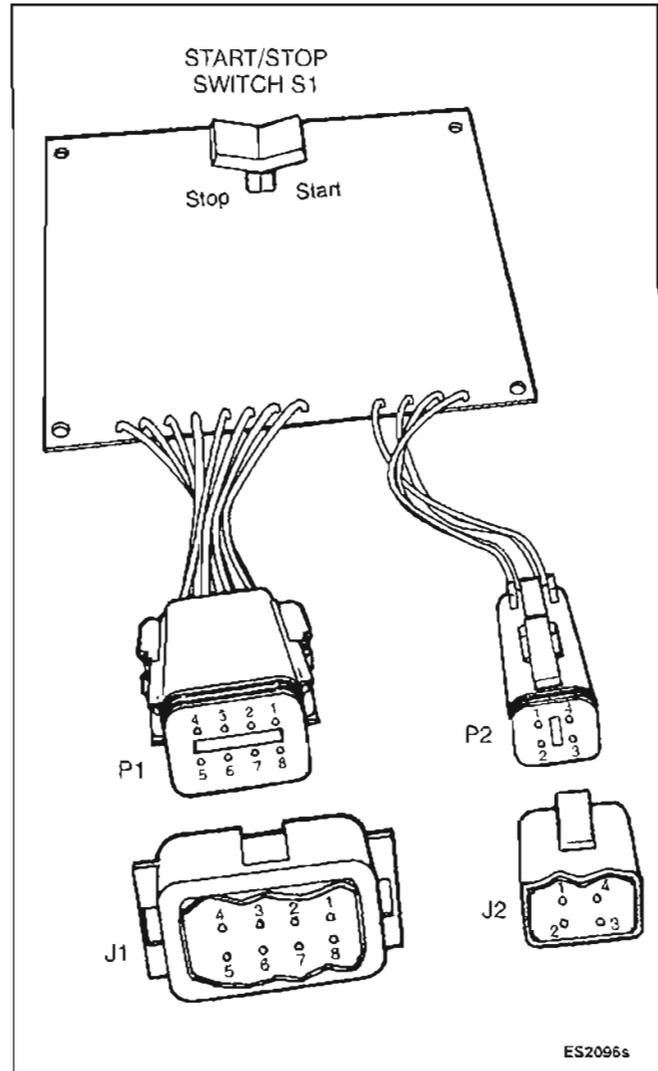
CONTROL ASSEMBLY (A1) – START/STOP SWITCH TEST
